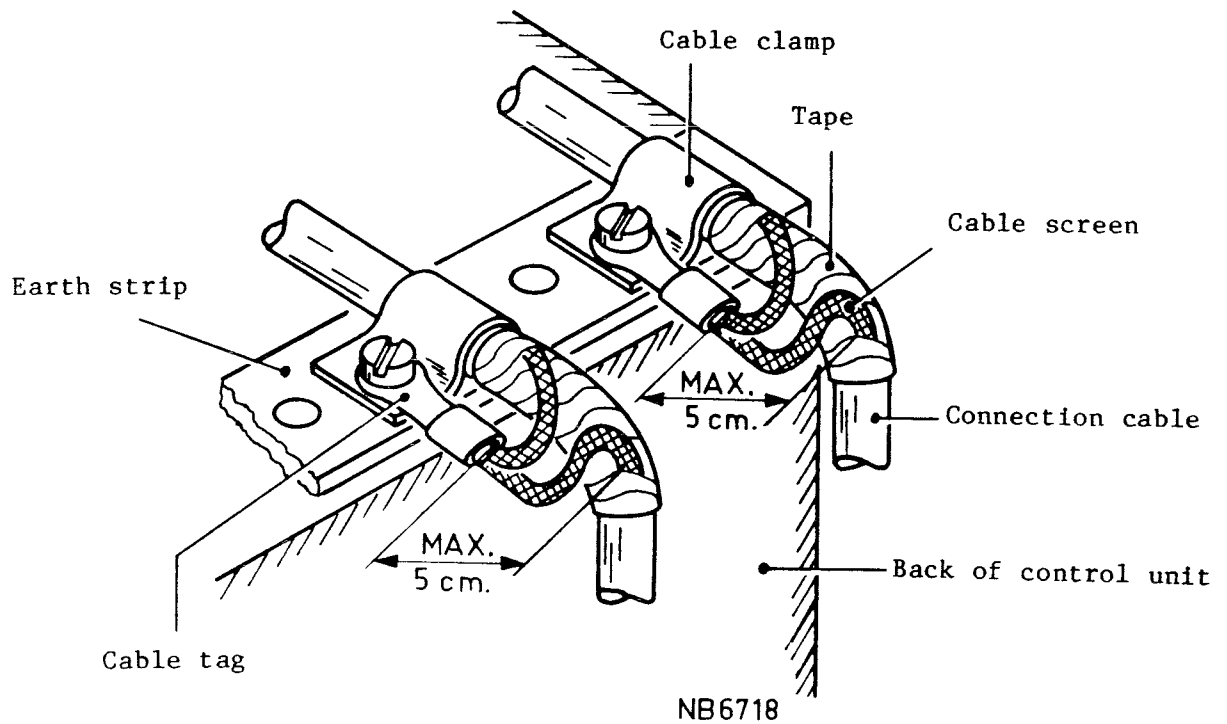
4 Fixing the cables to the control unit (top rear)
